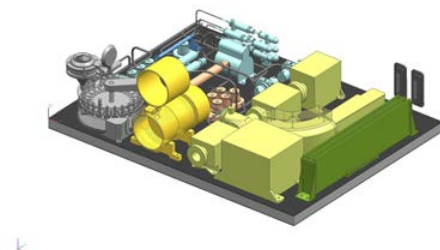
CAD model of the internal layout of L-VRAP. Subsystem details are listed opposite.
